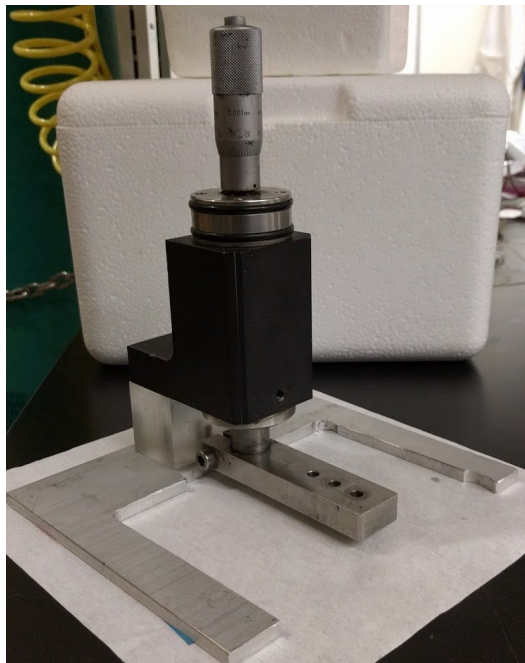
Custom built device assembly alignment tool. A vacuum line is connected to the innermost of the three holes on the center block. Device is placed on the bottom of the block, feature side down, and held in place by the vacuum. Micrometer dial on the top is used to lower the device backplane toward the microfluidic channel layer.
